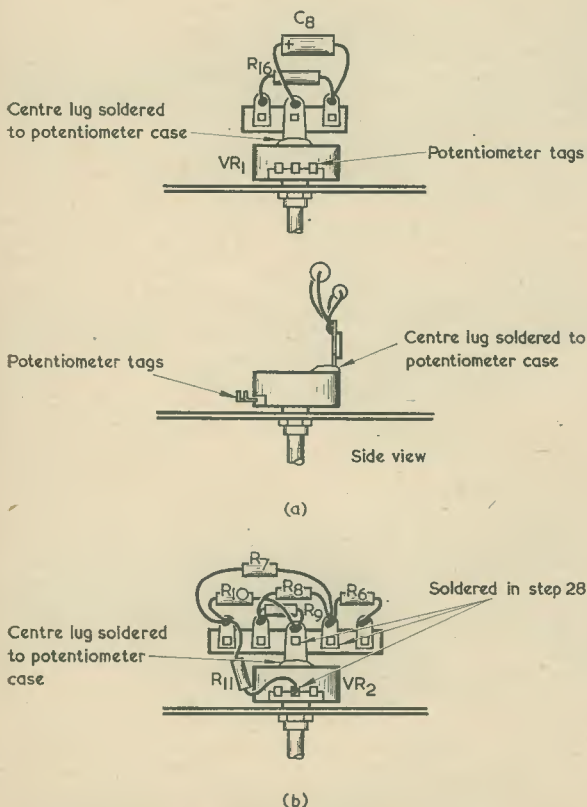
Wiring and mounting details for (a) the 3-way tagstrip and (b) the 5-way tagstrip
